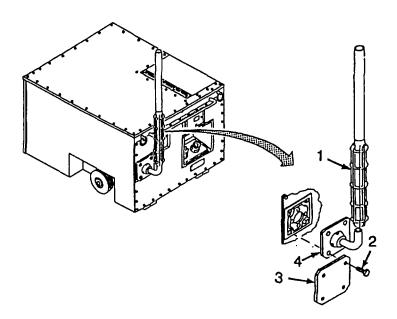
Exhaust Pipe (Sheet 1 of 2)
